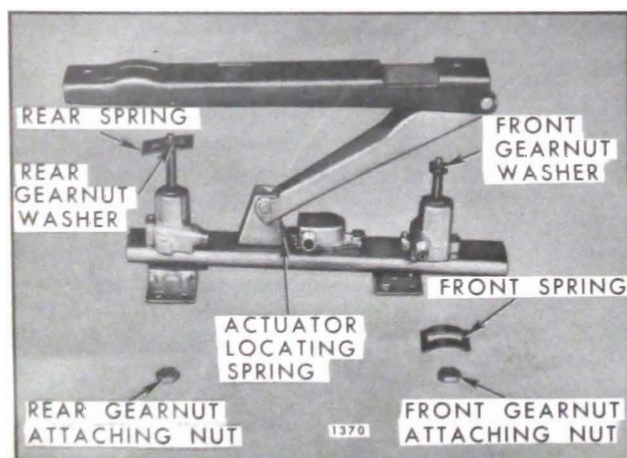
Six-Way Seat Adjuster - "B & C" Styles
